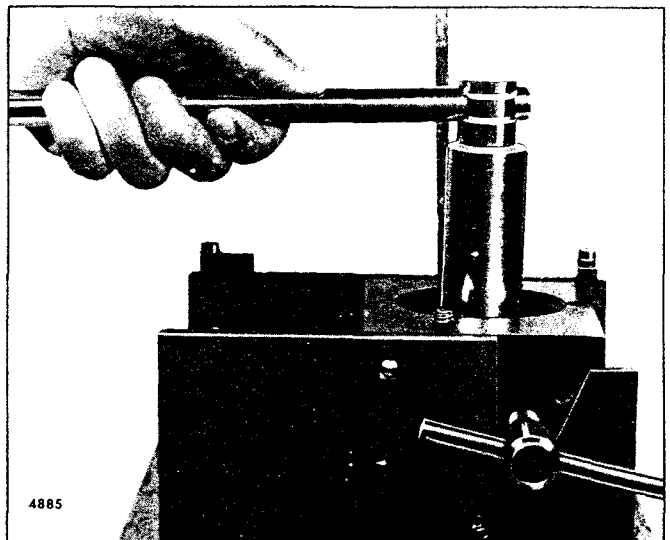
Removing Injector Nut Using Tool J 4983-01
